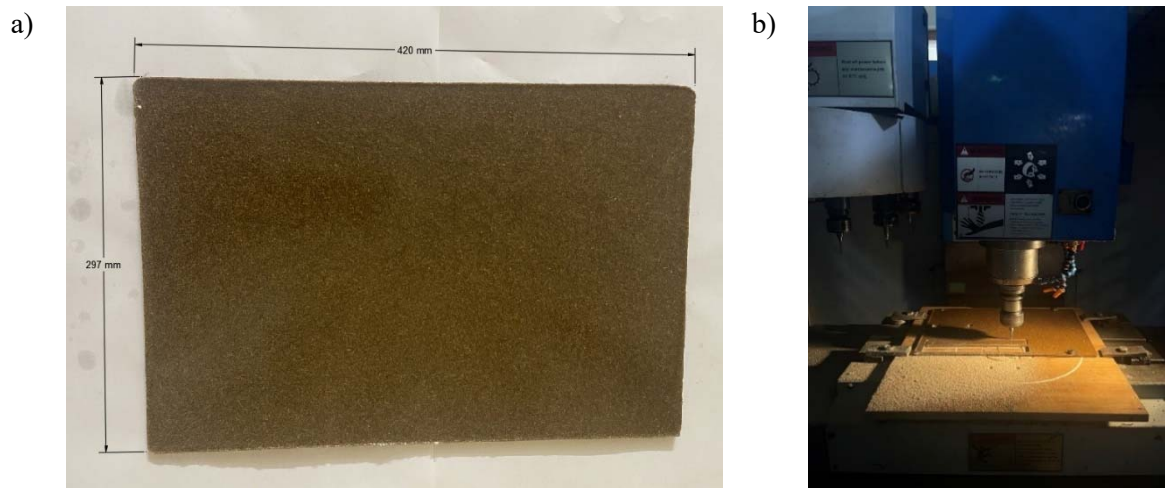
Experimental set up (a) manufactured biocomposite material (b) cutting process by CNC milling machine.
